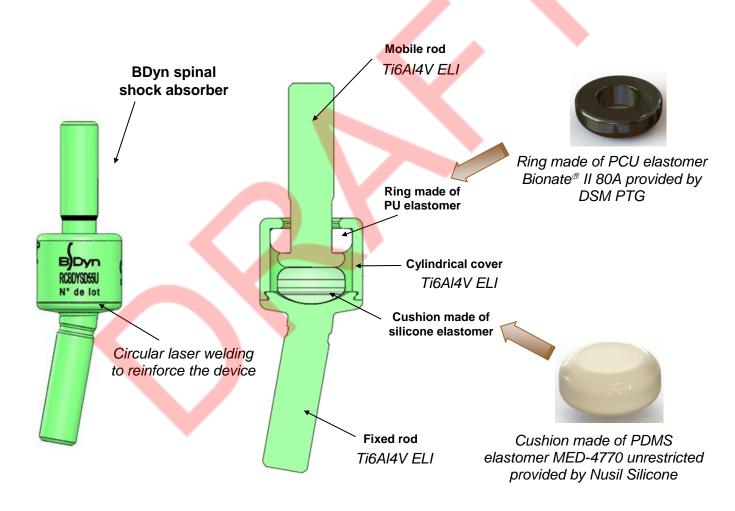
Isometric and cut view of the BDyn spinal shock absorber with its elastomer components
